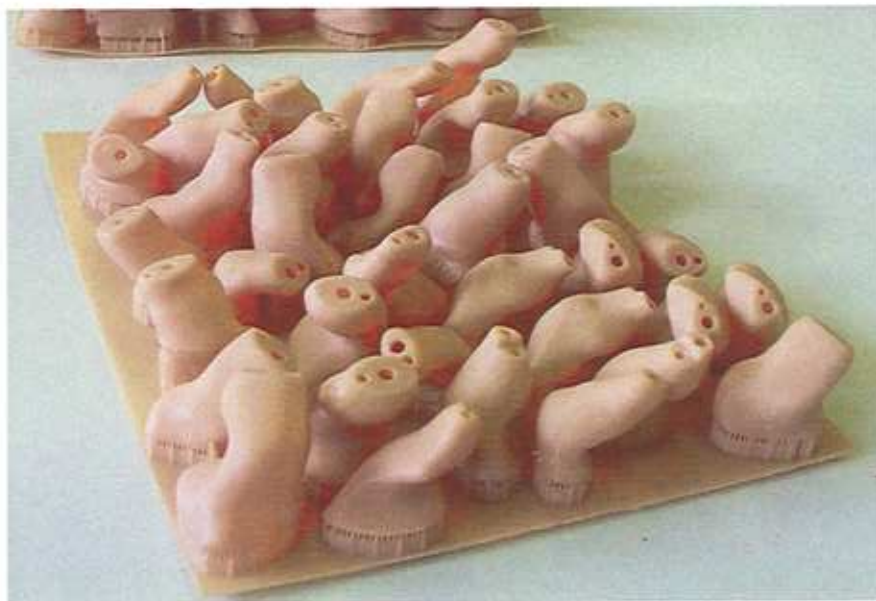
Hearing Aid Manufacture (courtesy of EnvisionTec)
